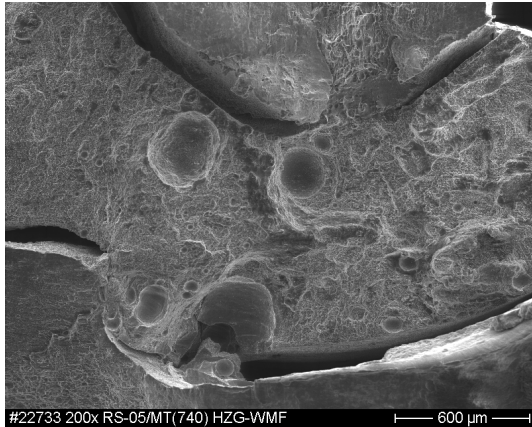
SEM: HAZ and FZ of the fracture surface of the four-stringer panel in the skin-stringer intersection
